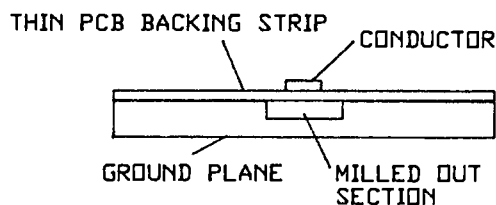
Cross-section of milled out ground plane with thin PCB placed on top.
